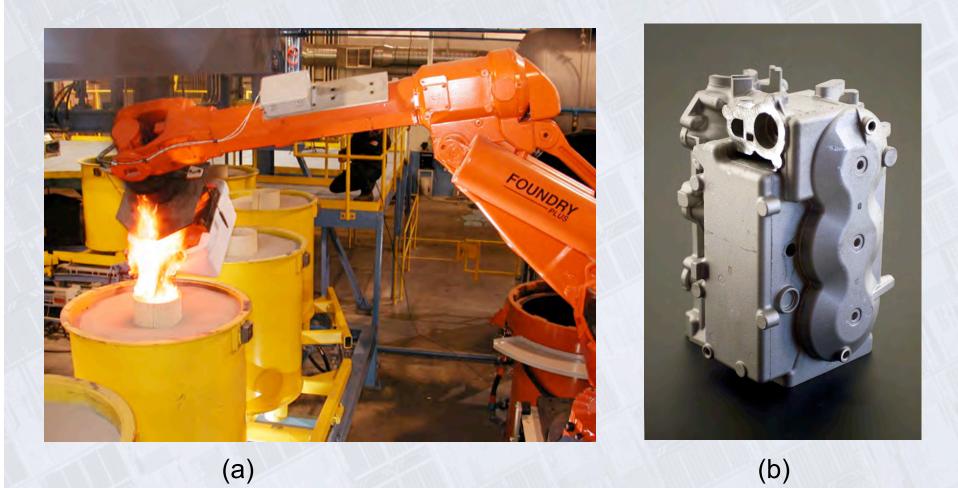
(a) Metal is poured into mold for lost-foam casting of a 60-hp. 3-cylinder marine engine; (b) finished engine block. Source: Courtesy of Mercury Marine.
